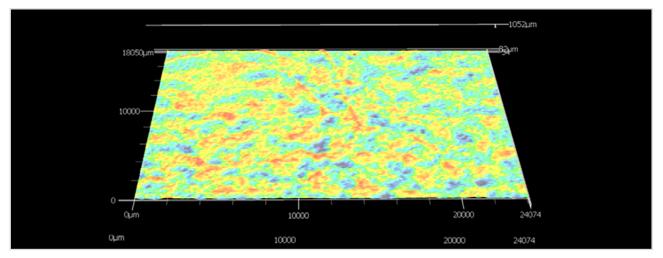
Keyence non-contact profilometer 3D image of a casting using a coated core (Sa – 14µm).
